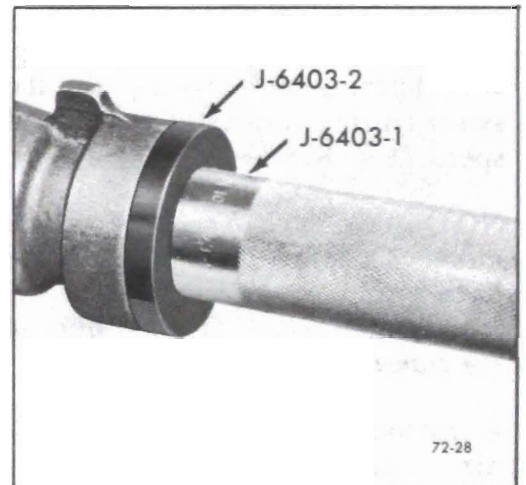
Installing Rear Bearing Retainer Oil Seal
